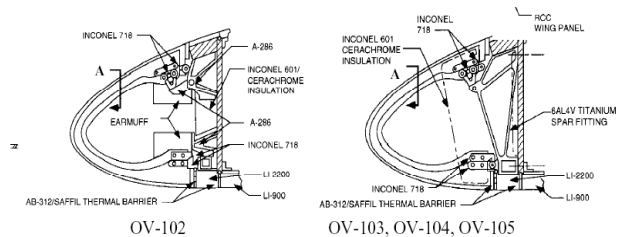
Details of the orbiter structure and RCC leading edge structure¹³
